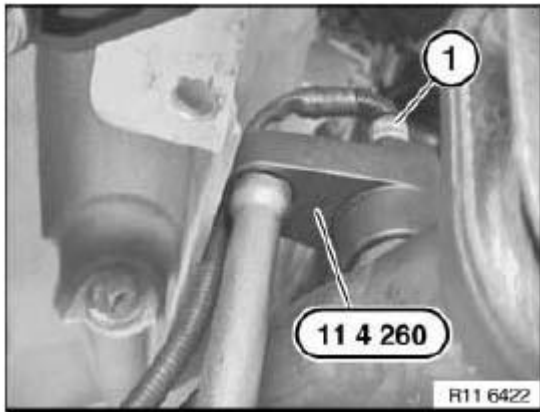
Identifying Special Tool (11 4 260) And Monitor Sensor
